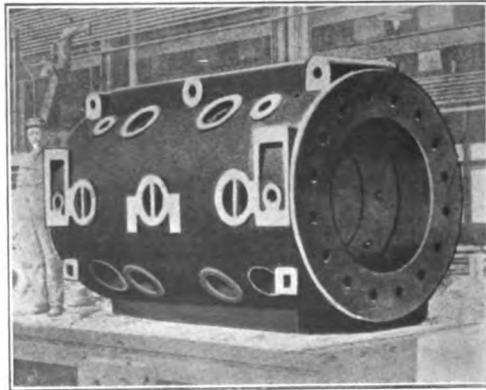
Cylinder Casting, Allis Chalmers Co.
